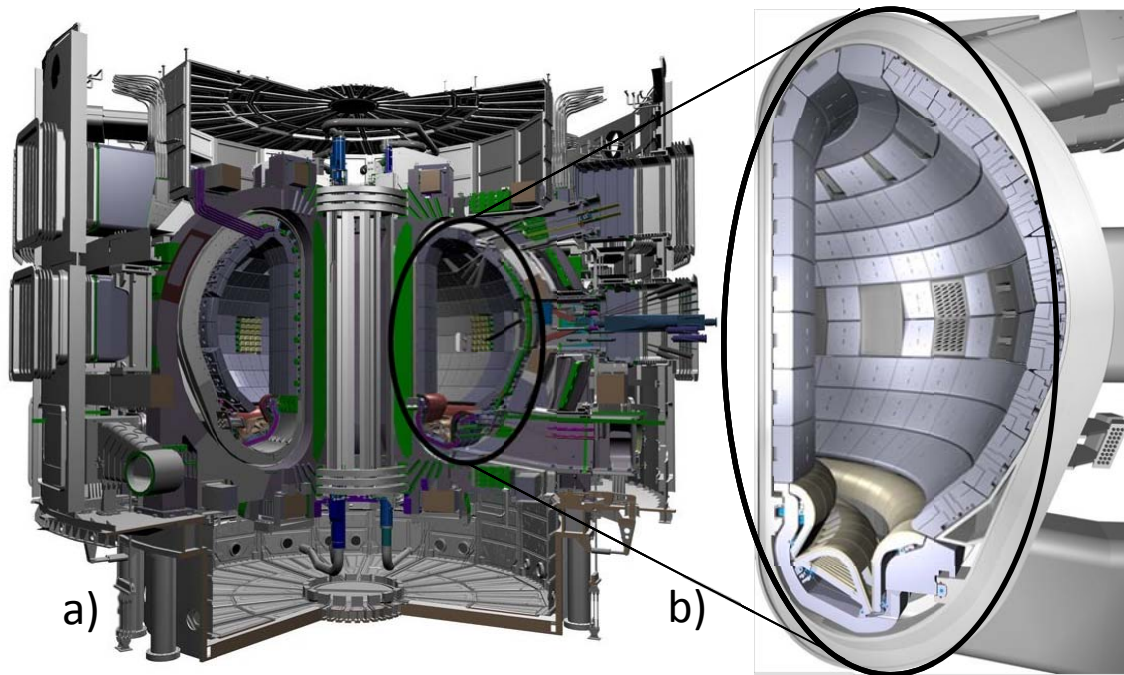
a) A cross-section of the complete ITER fusion device being designed to generate future fusion power. b) A close-up of the tokamak vessel with Plasma Facing Material (PFM). [a]
